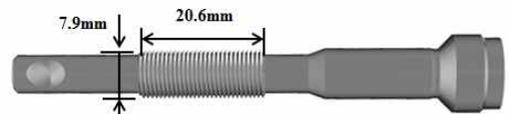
Schematic drawing of 3D-modeling for diaphragm valve
